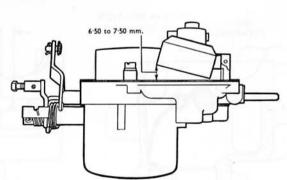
Location for checking the carburetter float position. The dimension should be within the limits shown
